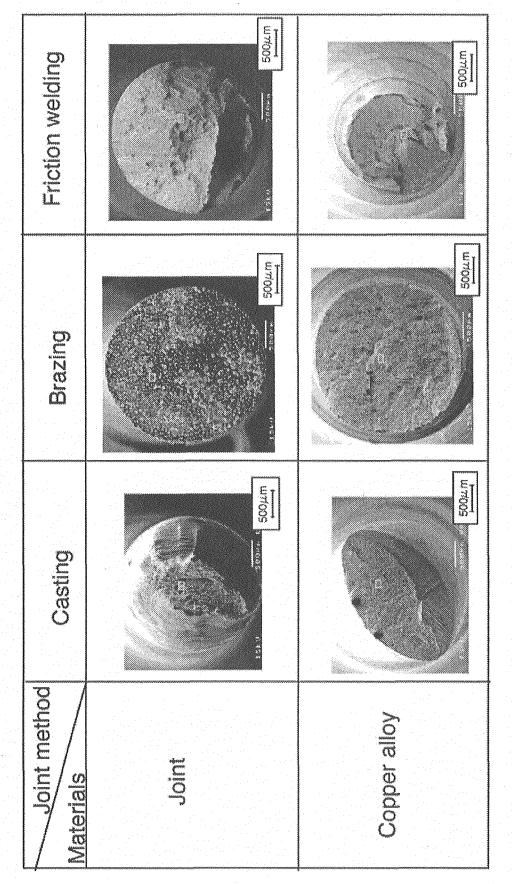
Fracture surface of irradiated specimens after tensile test (Test temperature: 150°C).
